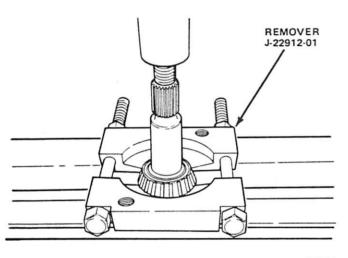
F-49 Pinion Rear Bearing Removal—Model 30-44 Axie
